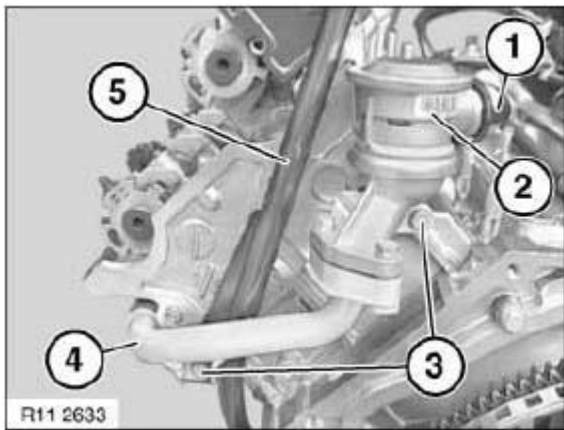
Identifying Hose, Check Valve, Tube And Sealing Ring
